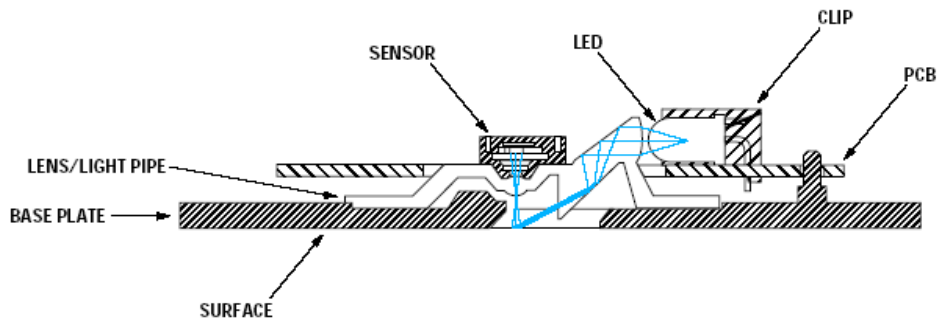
Sectional view of PCB assembly highlighting optical mouse components.
